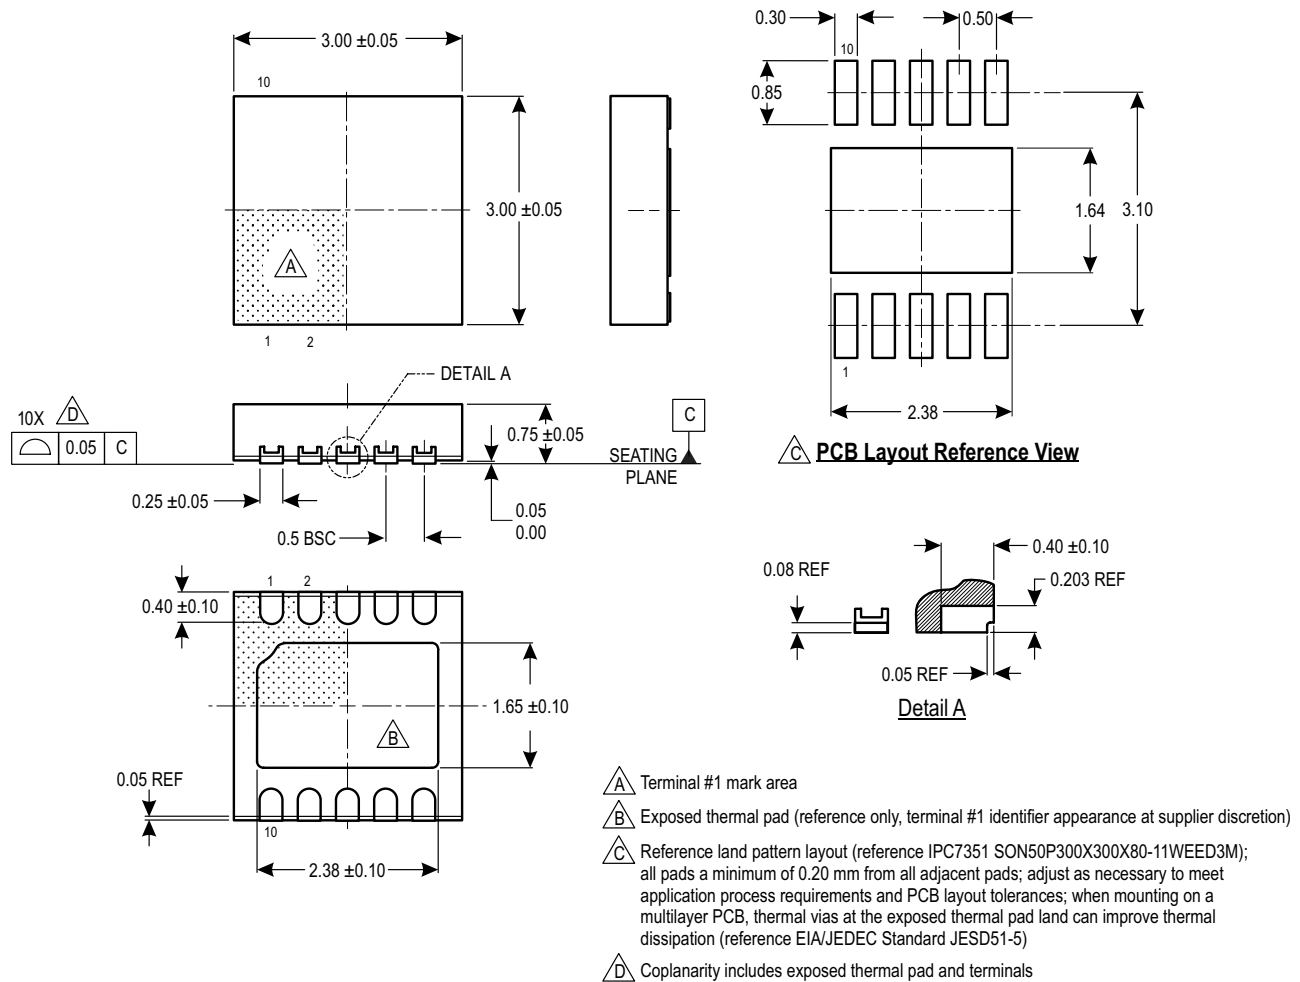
Package EJ, 10-Pin DFN with Exposed Thermal Pad and Wettable Flank
